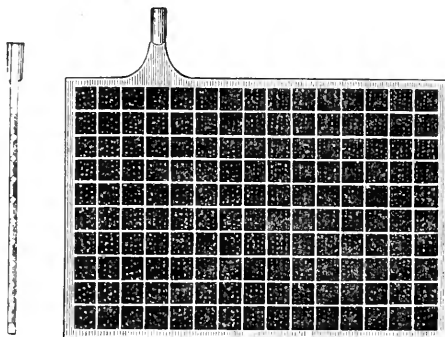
PLATE WITH HOLES OF LARGER EXTERNAL DIAMETER (filled with paste).
